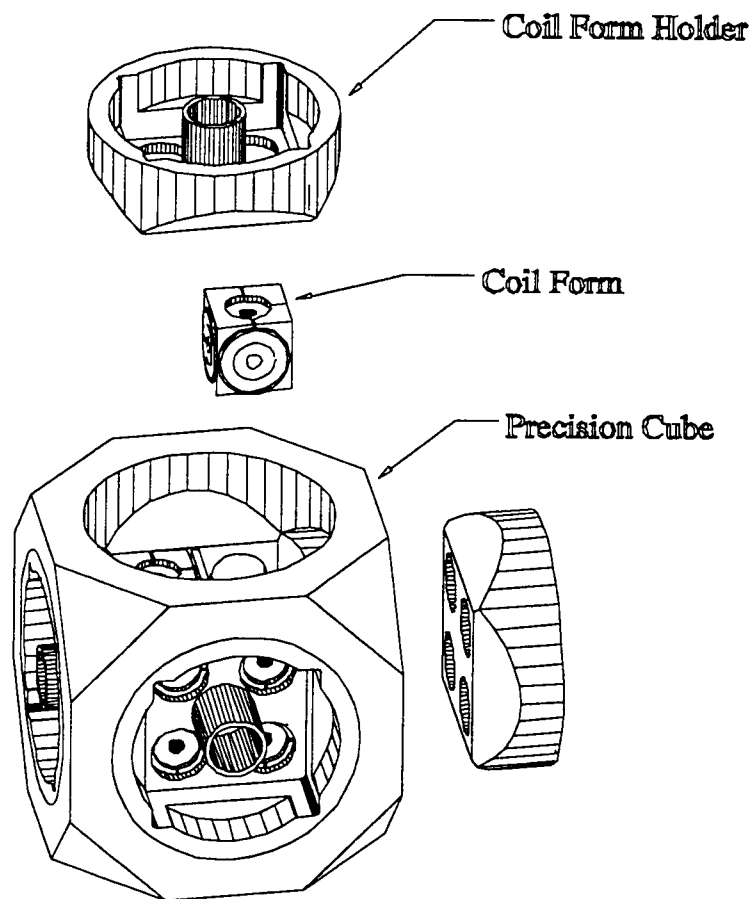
Components of the SSA sensor, shown partially disassembled. The precision cube is 101.60 mm (4.000 in) on a side. A niobium coil form holder fits into the hole on each face of the precision cube. They form a cubical cavity 50.80 mm (2.000 in) on a side. The cubical coil forms fit into the eight corners of this cavity. They in turn form a cavity in the shape of the proof mass, but 0.6 mm (0.024 in) larger in all dimensions. There are single layer spiral coils on all interior faces of the coil forms.
